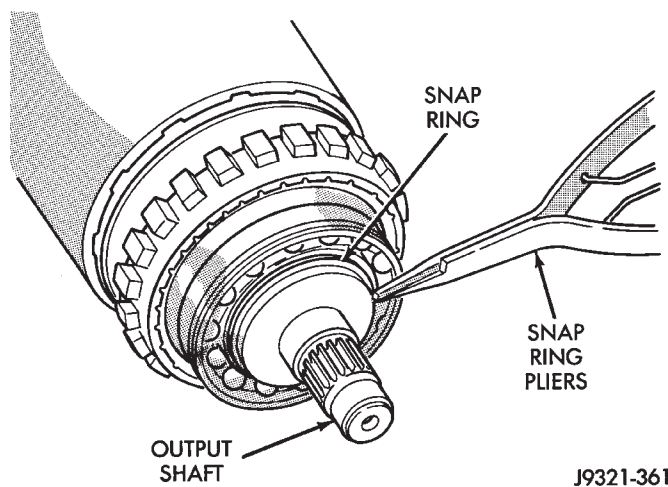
Rear Bearing Snap Ring Removal/Installation
